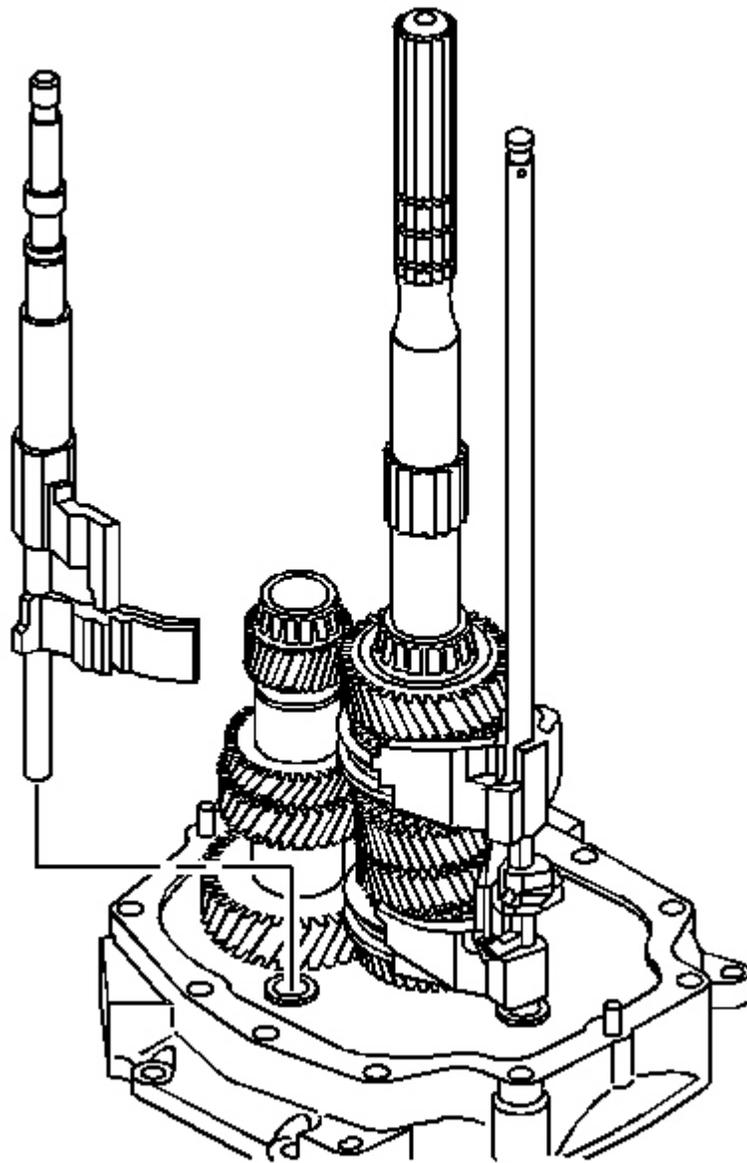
View Of 5th/6th & Reverse Shift Shaft
